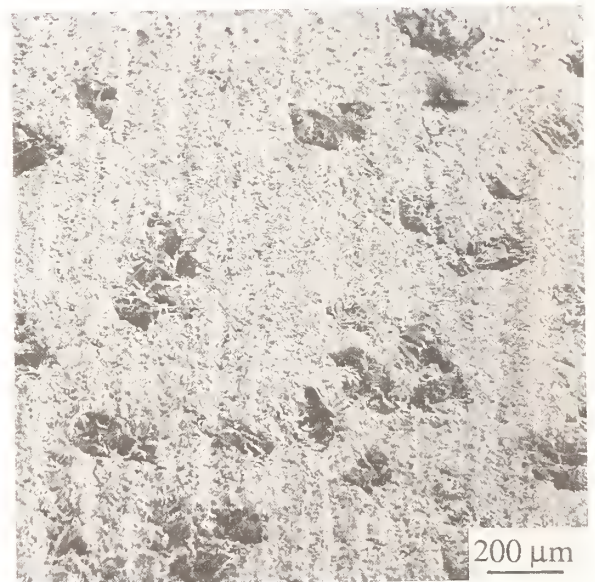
Surface topography of diamond abrasive tool of Type D.
